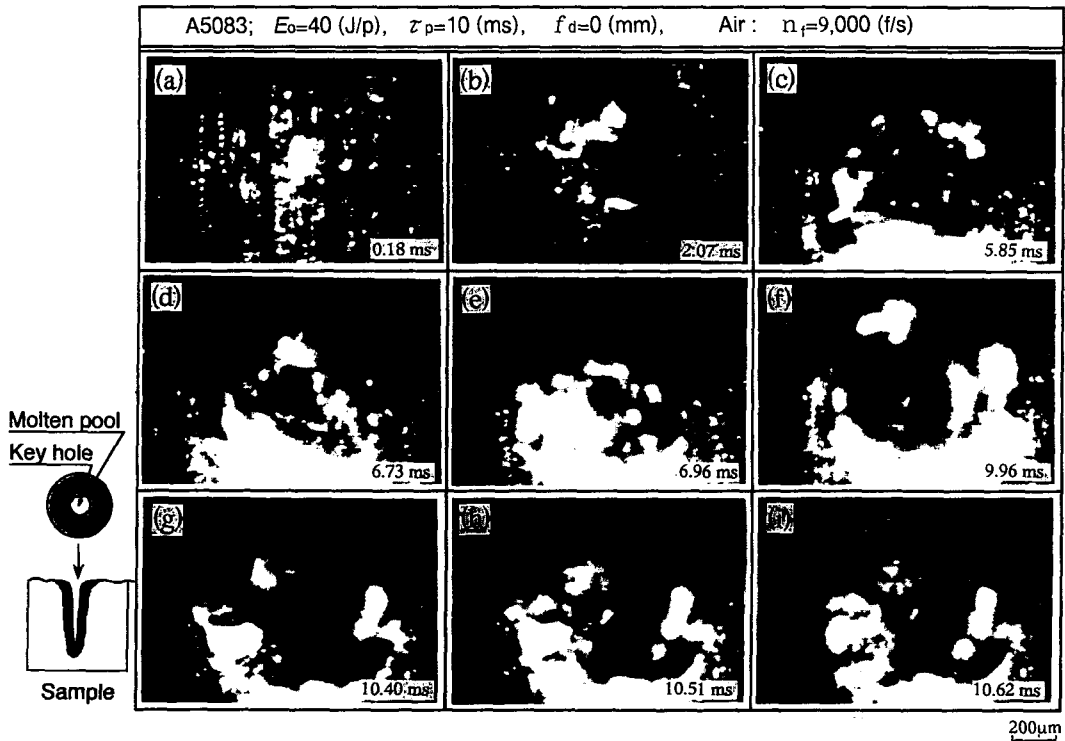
Typical temporal change in keyhole surface geometry in molten pool during YAG laser spot welding of A5083 alloy in air.
